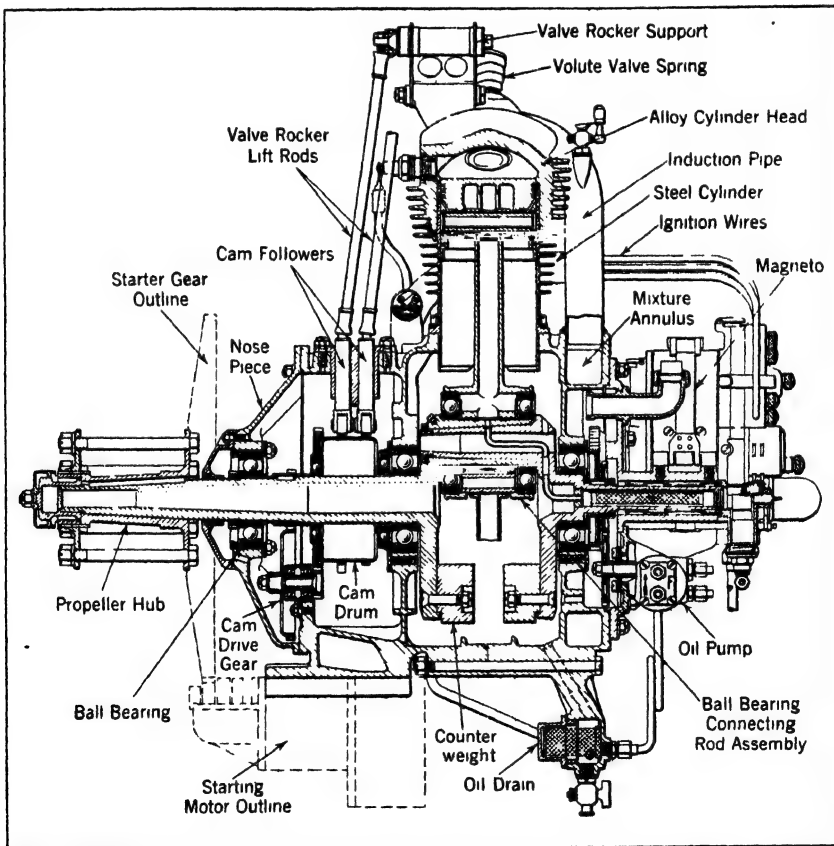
Longitudinal Sectional View of the Siemens Static Radial Cylinder Air-Cooled Motor.
